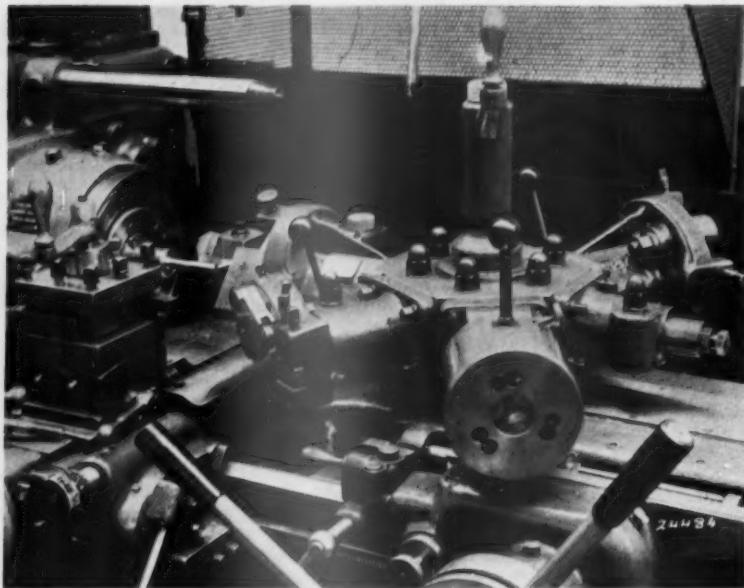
Tooling layout, including a Rollrite diehead, for machining a pad bolt on a Herbert capstan lathe
